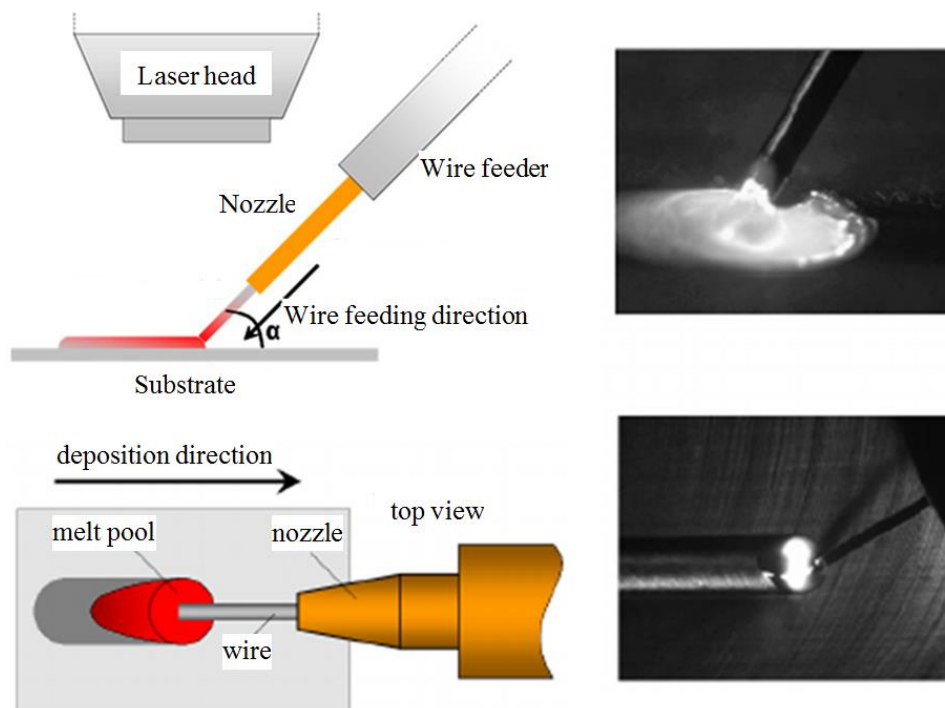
Left: Schematic drawing of the wire-feed process. Right: Top-and side view images of the real process [35].
